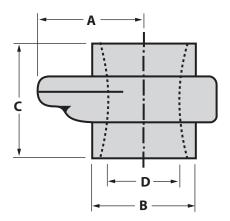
4,000 psi (276 bar) to 4"; 2,500 psi (172 bar) cold working pressure, 5" to 12"
